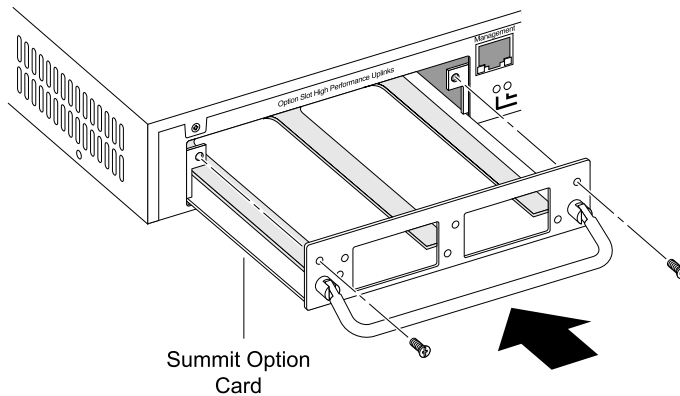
Installing a Summit Port Option Card (XGM-2xn Shown)
